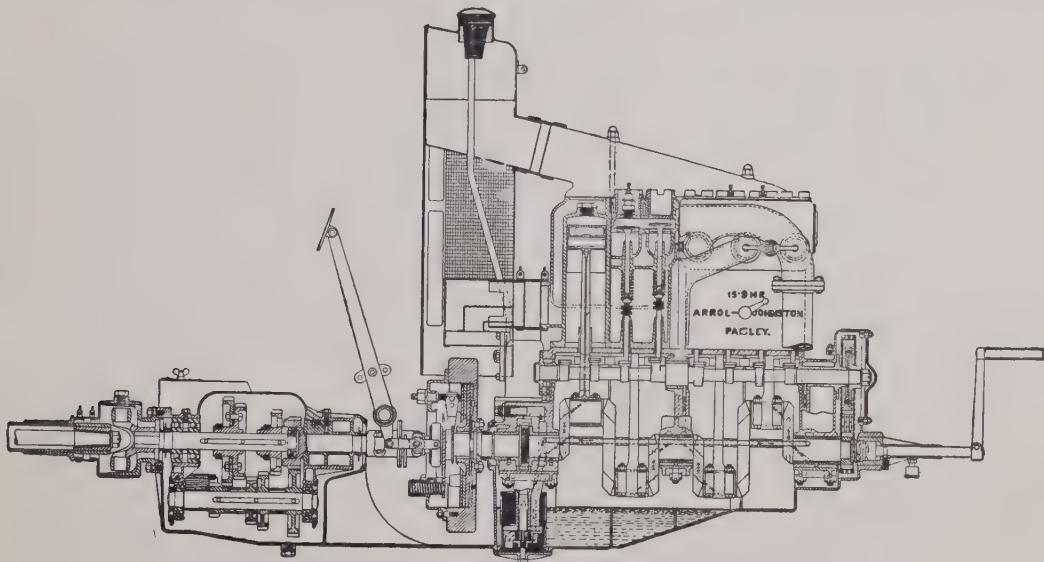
Thermo Syphon Cooling Radiator behind Engine.
